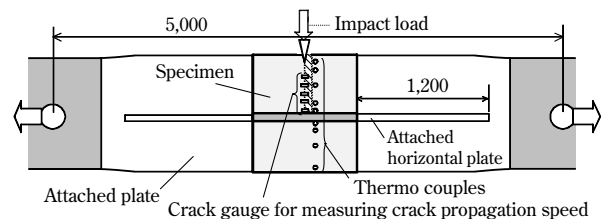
Schematic illustration of experiment for T-weld specimen
